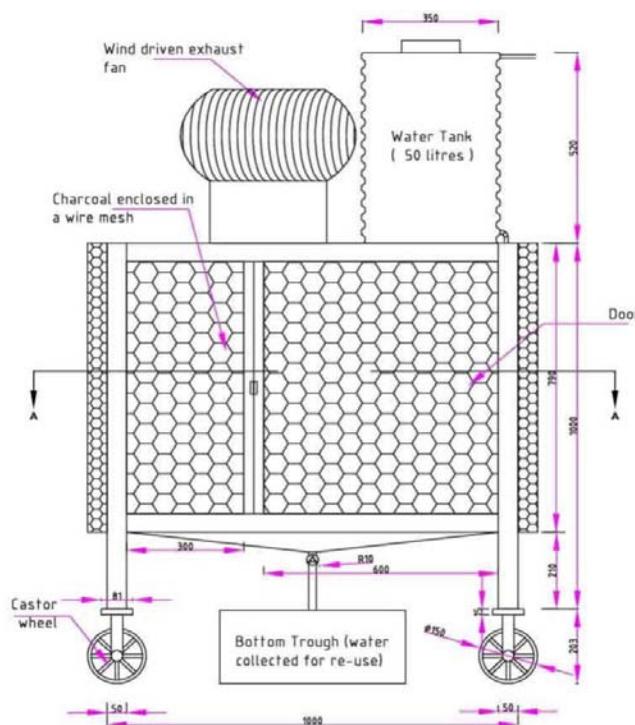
Front view of the drip type charcoal evaporative cooler (all figures in mm)
